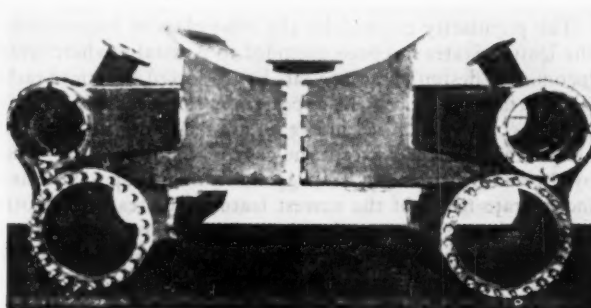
ALL-WELDED CYLINDER-SADDLE ASSEMBLY FOR THE SOUTH AUSTRALIAN LOCOMOTIVE
